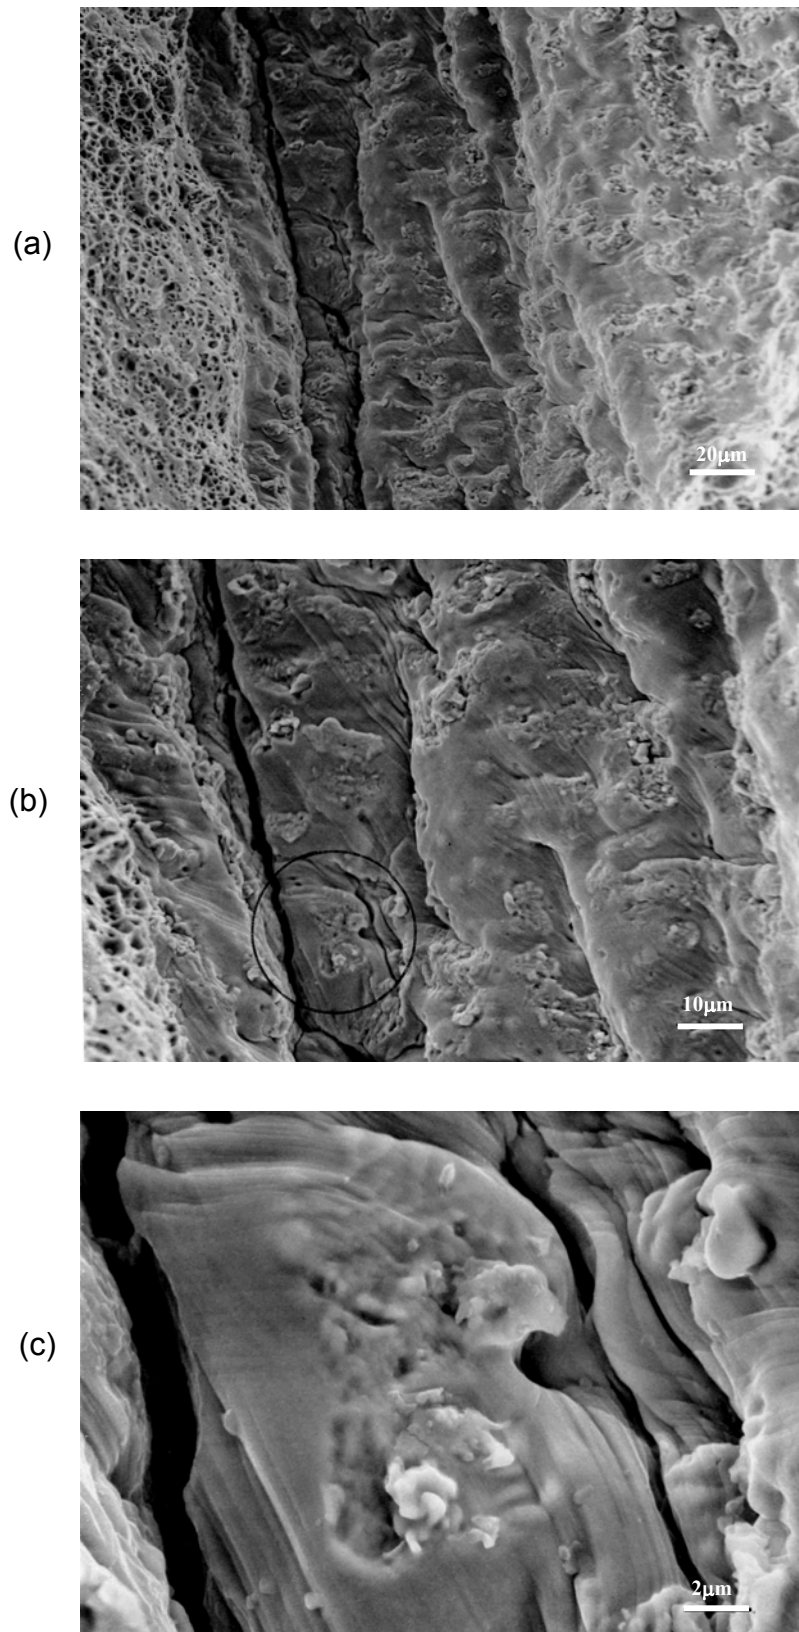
SEM fracture surface morphology of microfissures in M308L weld pad.
